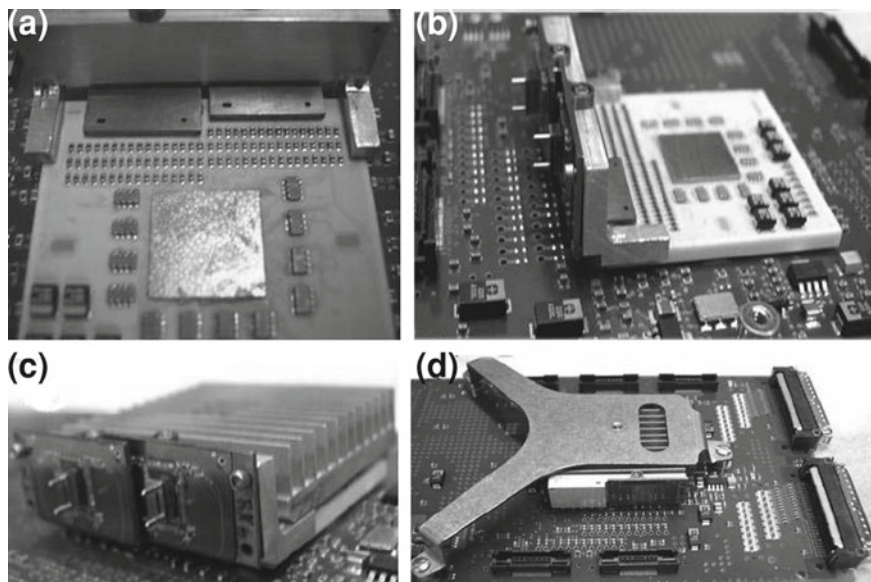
a Rear view of ceramic carrier showing ASIC and MAUI flex attachment points, b side view, c optics attachment view and, d entire test bed board [79] (© 2005 IEEE)
